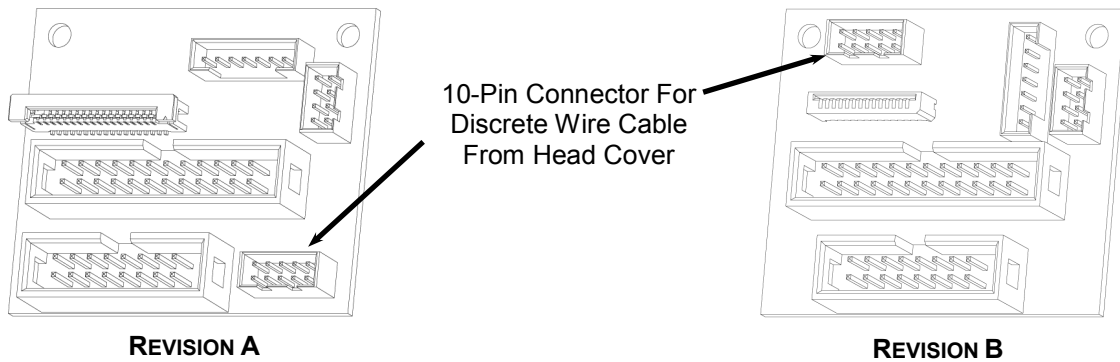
LOCATION OF CONNECTOR FOR HEAD COVER CABLE FOR THE EARLIER REVISION A AND LATER REVISION B MACHINES
